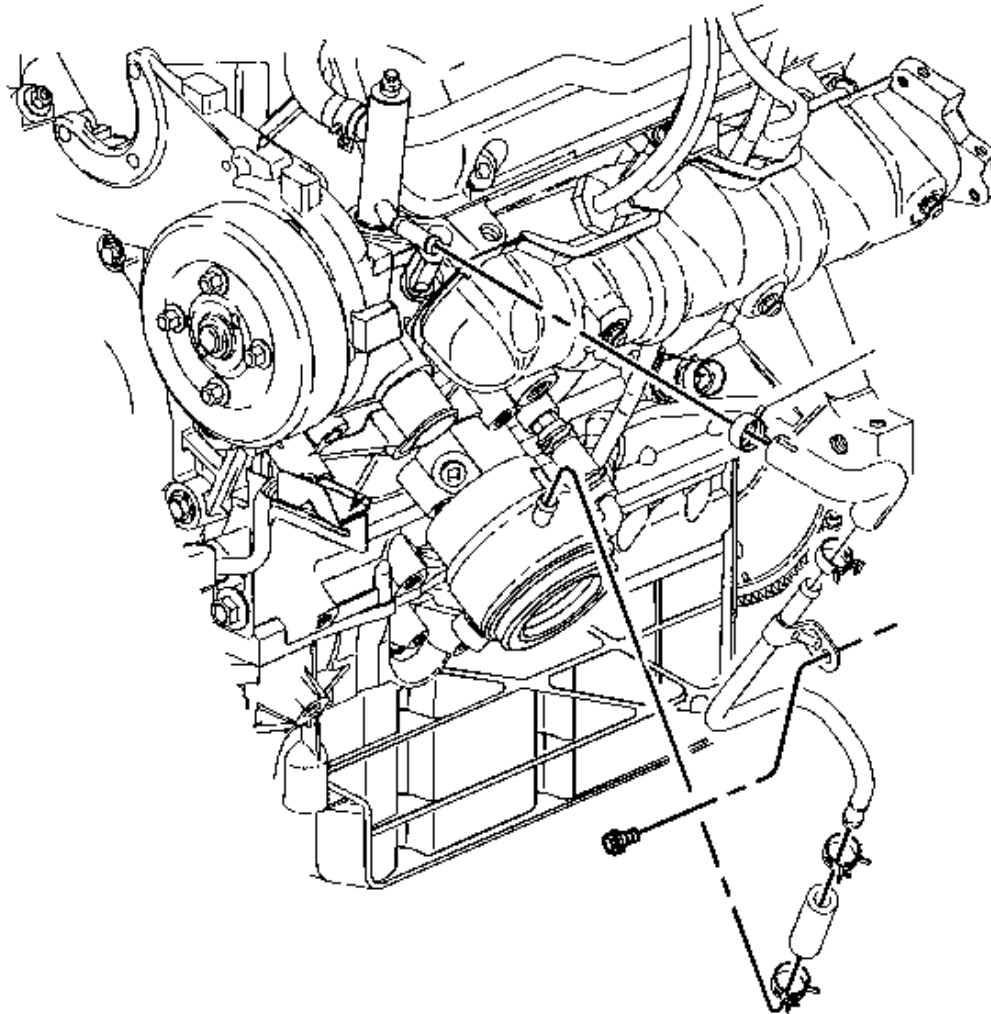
Locating Upper Oil Cooler Outlet Hose
